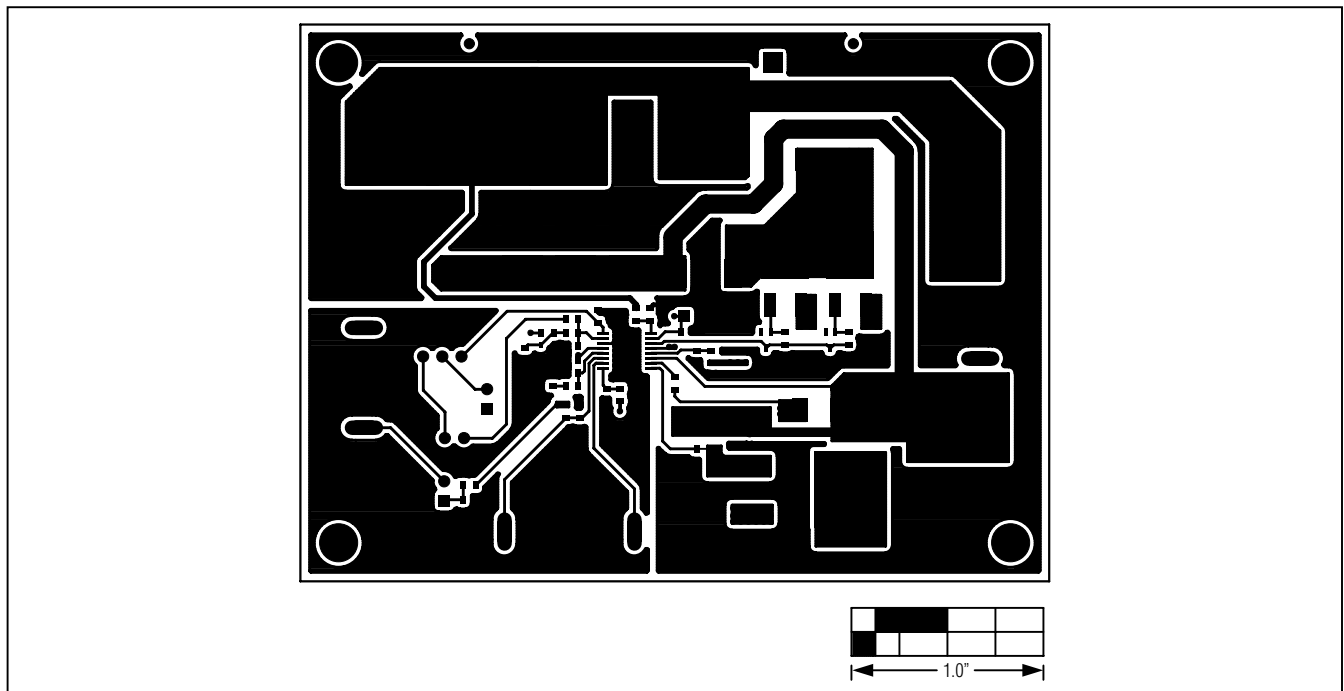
MAX16833 EV Kit Component PCB Layout—Component Side
